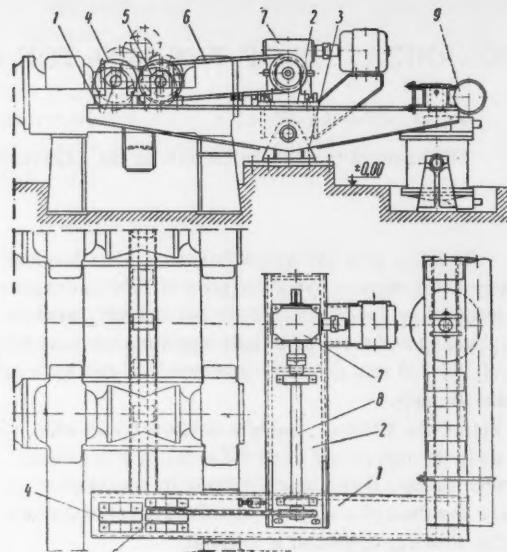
Manipulator designed by V. G. Attaryan for turning tube billets: 1) frame; 2) carriage; 3) bearings; 4) nondriving roller; 5) driving roller; 6) belt; 7) gears; 8) transmission; 9) counterweight.
